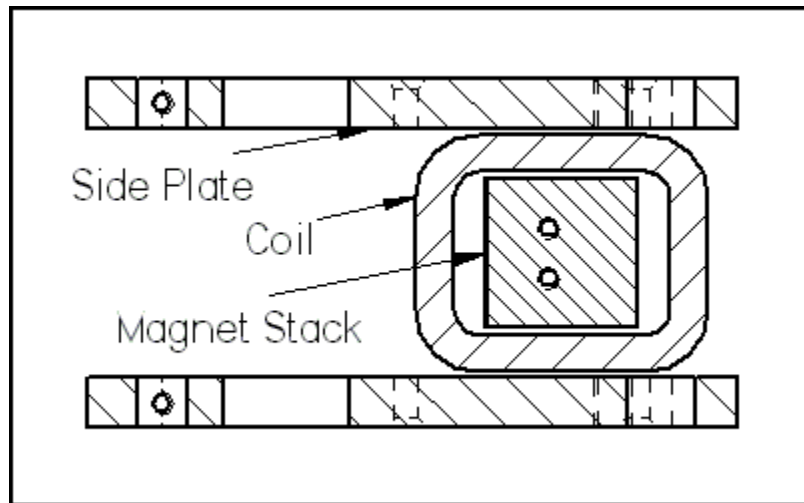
Section view of coil and magnet assembly along the midline of the device showing the fit of the coil between the magnet stack and the side plates of the assembly.
